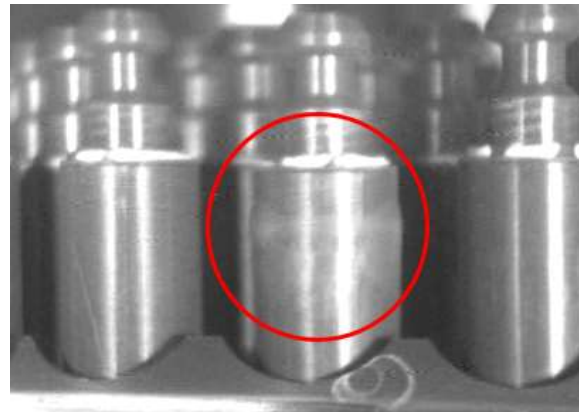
Secondary hydriding on FR end plug/cladding weld.
